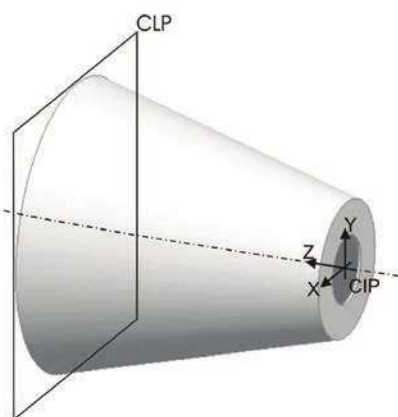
V-groove end mill: Sketch of the cutting part
